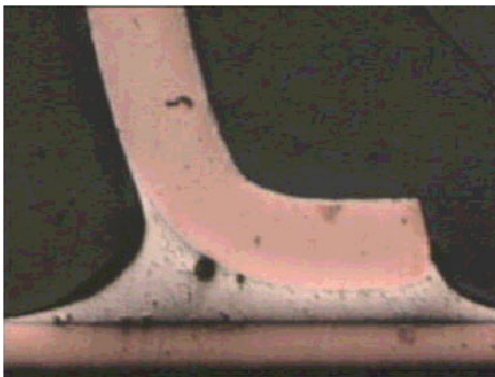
208L PQFP solder joint (SnPb lead finish; SnPb solder paste with NiAu PCB surface finish).
